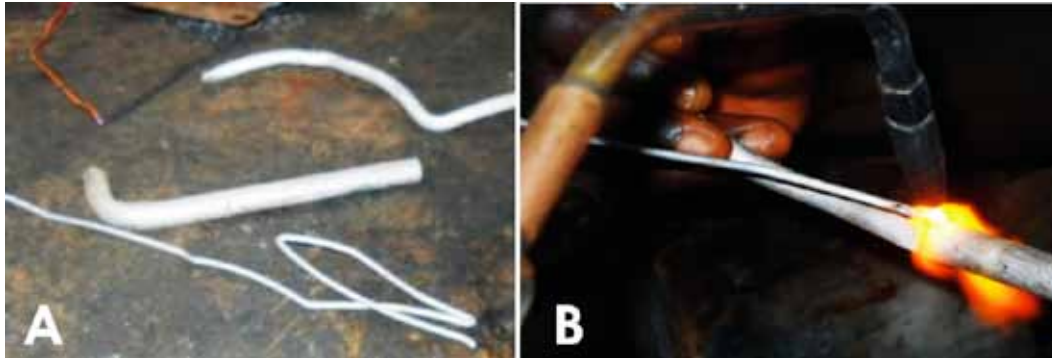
Aluminium filler materials (A), test welding of aluminium material (B).
